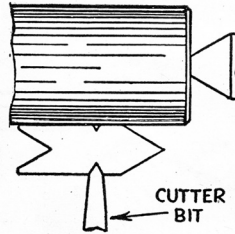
Cutter bit set square with work for cutting external screw threads.
